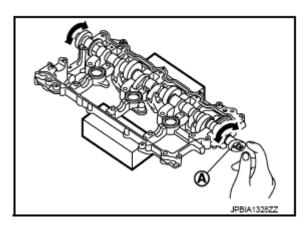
Checking Drive Shaft Rotation Courtesy of NISSAN NORTH AMERICA, INC.
